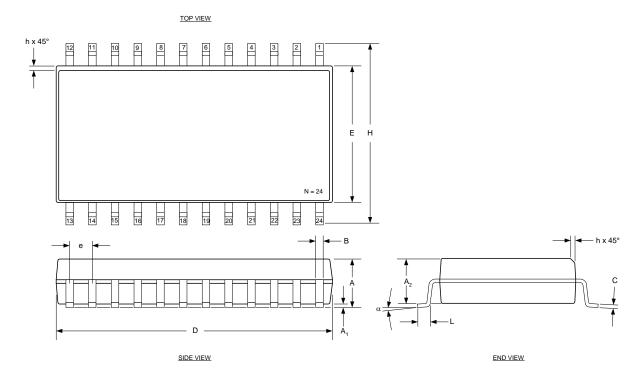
Package Outline Drawing SOP24, 300 MILS
